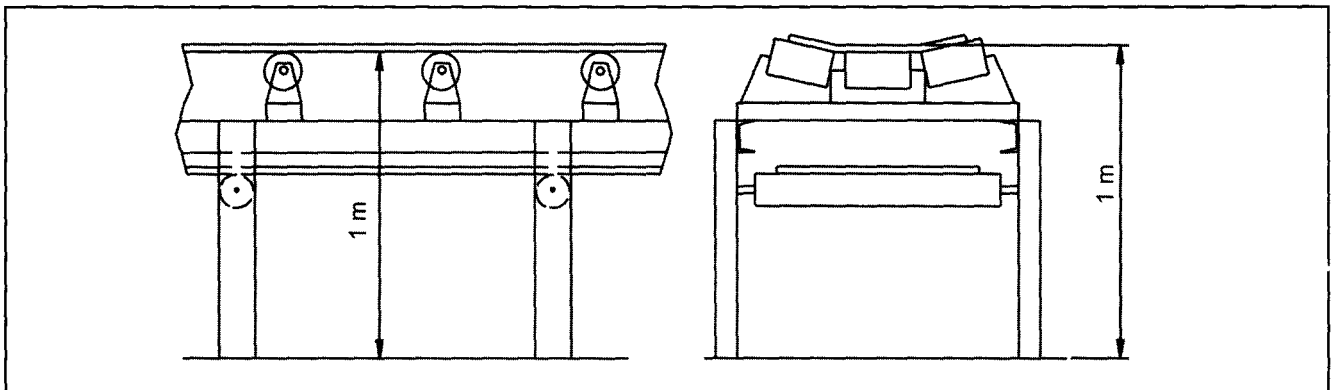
Belt conveyor supporting structure when conveyor is level.
